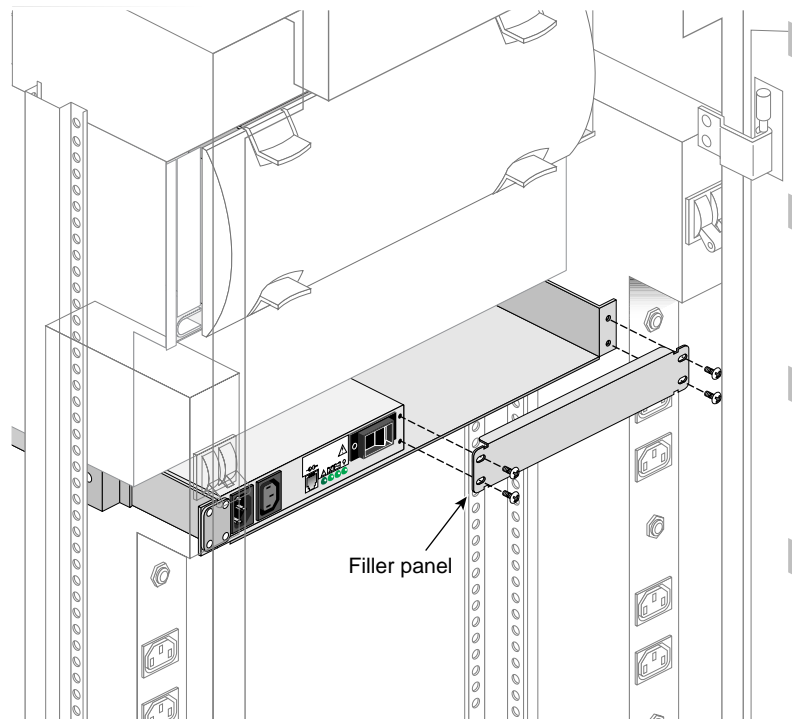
Attaching the Rear Half-Length Filler Panel
